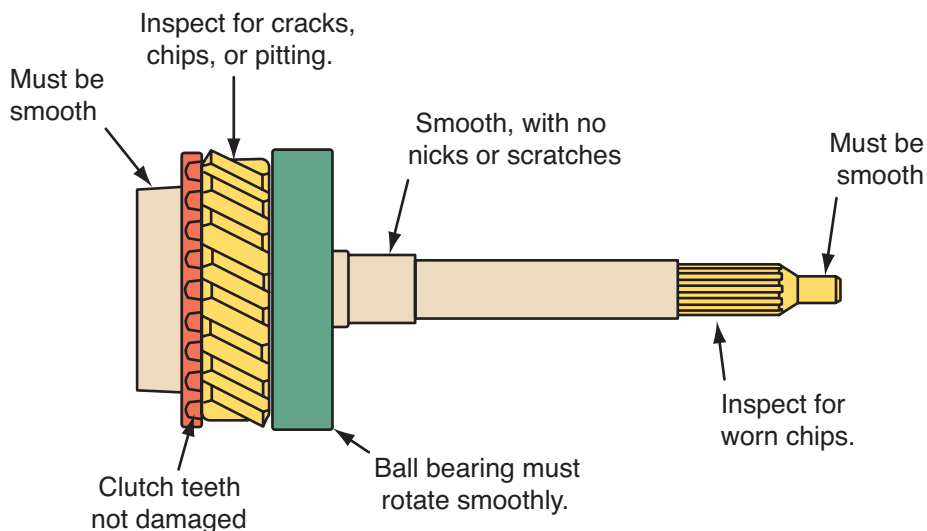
The input shaft, including the splines, should also be carefully inspected.
